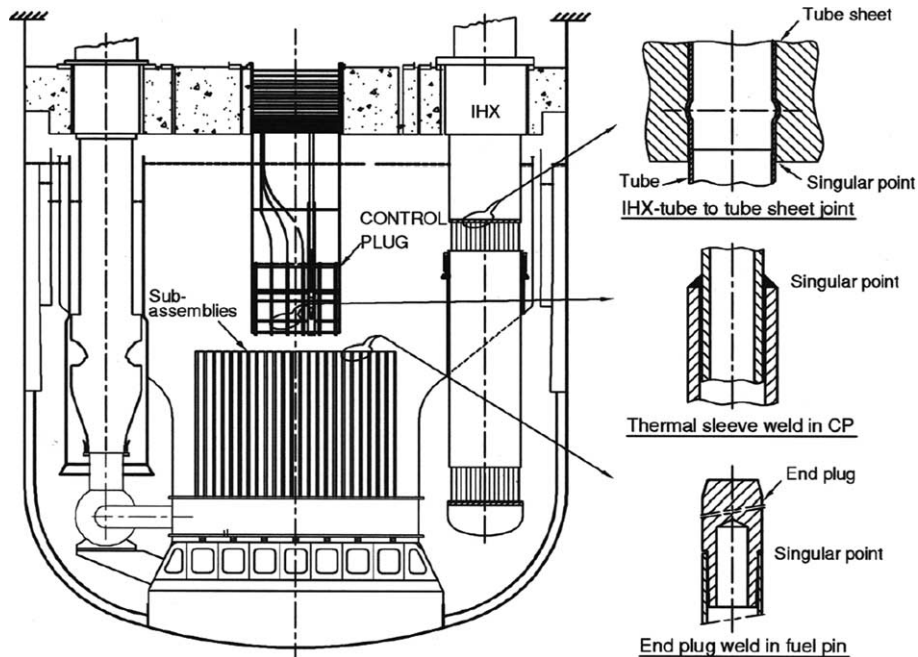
Welds with singular points in fast breeder reactor assembly.
